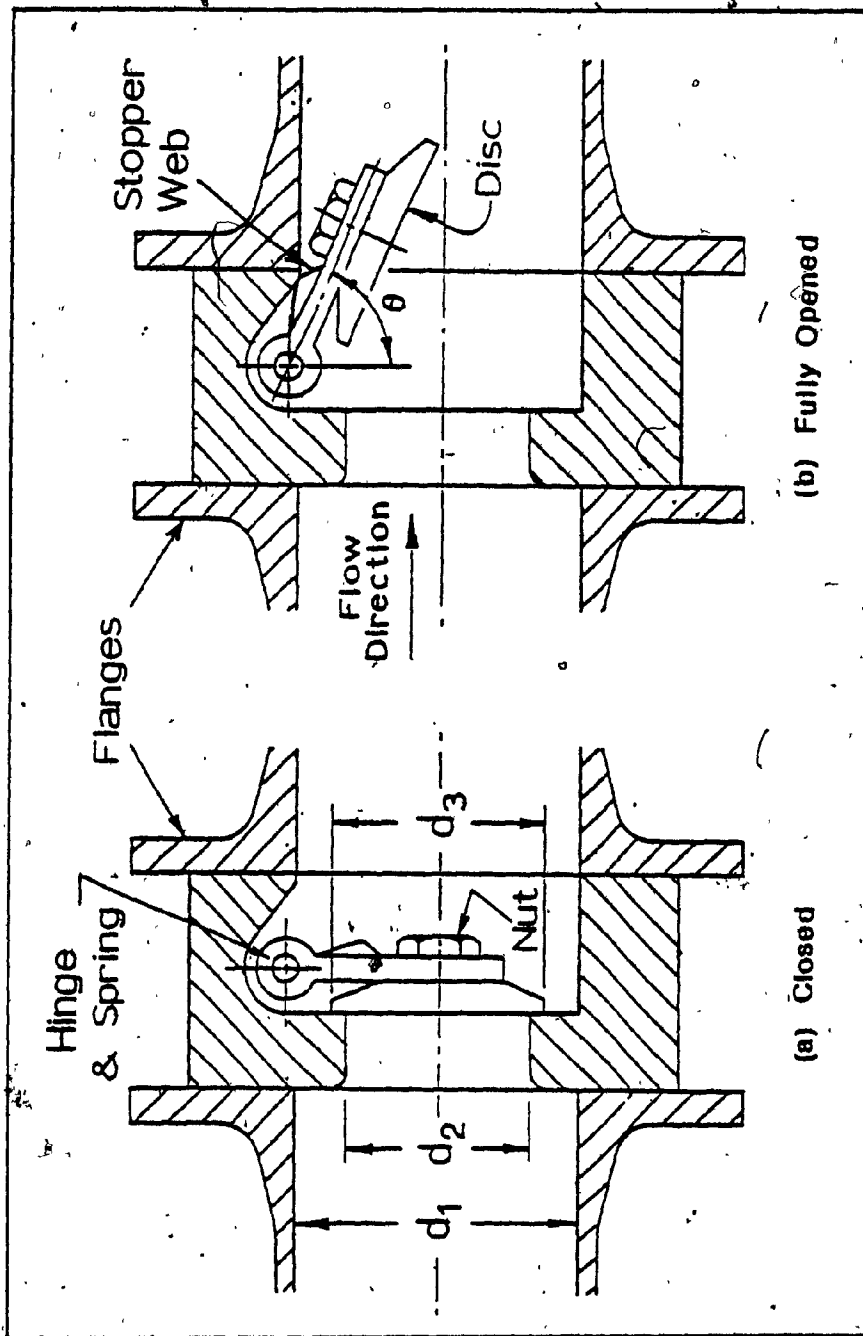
Schematic Drawing of Wafer-Type Swing-Disc Check Valve
